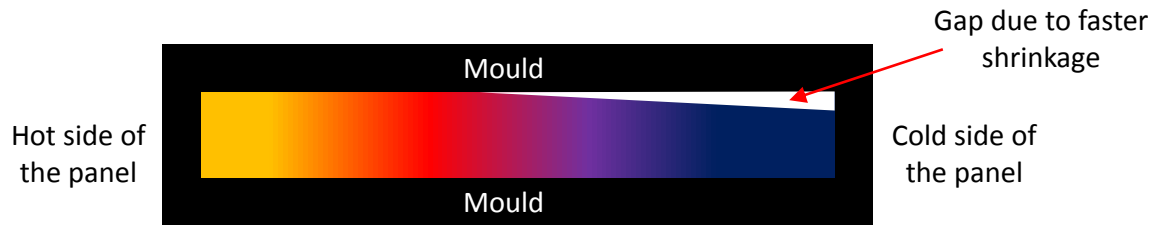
Gap between the mould and the cold side of the panel due to non-uniform shrinkage
